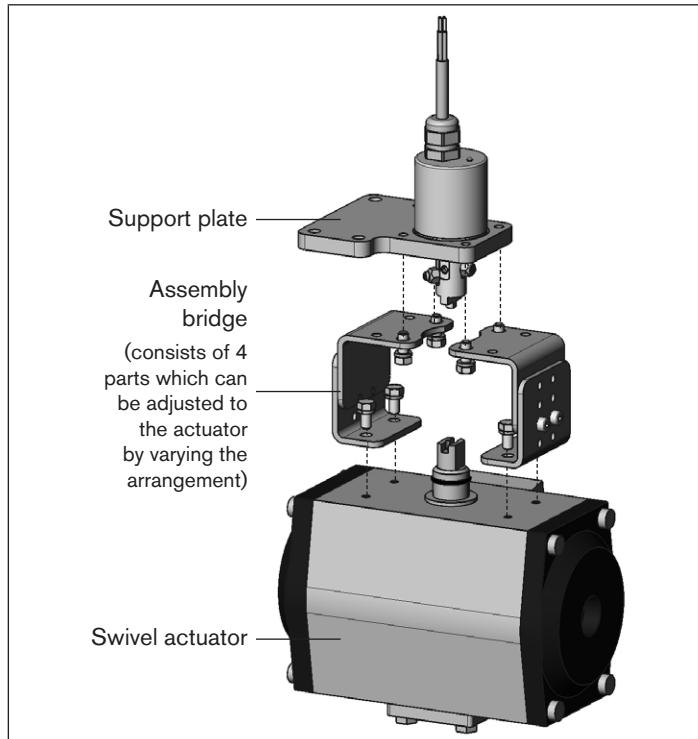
Fitting the rotating Remote Sensor to a swivel actuator
